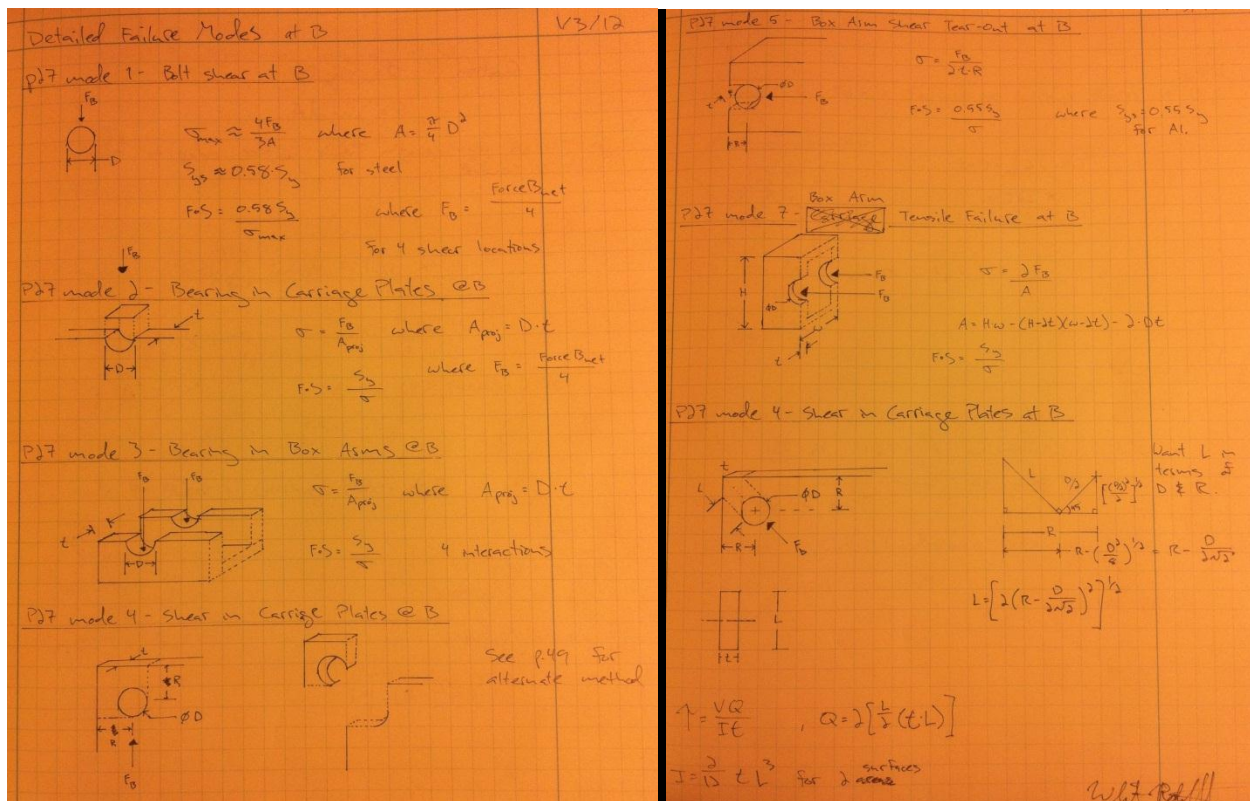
DETAILED FAILURE MODES AT POINT B.
